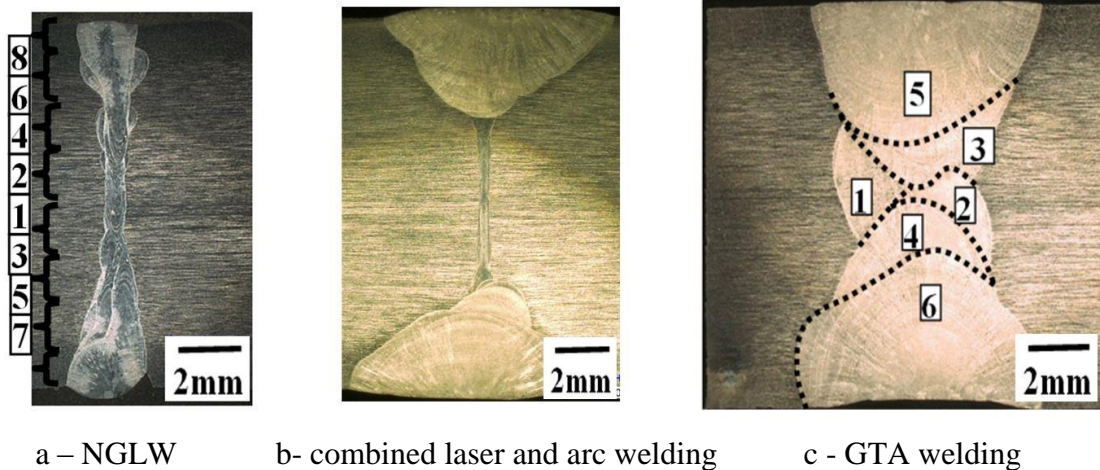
Bead cross section of 10 mm thickness welding from 2 sides
